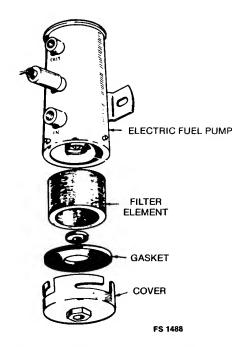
BENDIX AND FACET ELECTRIC PUMP FILTER
